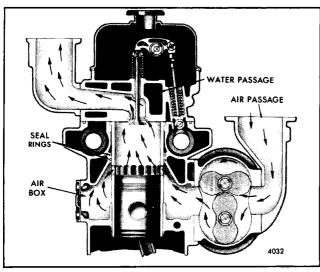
Air and Water Passages in In-line Cylinder Block
